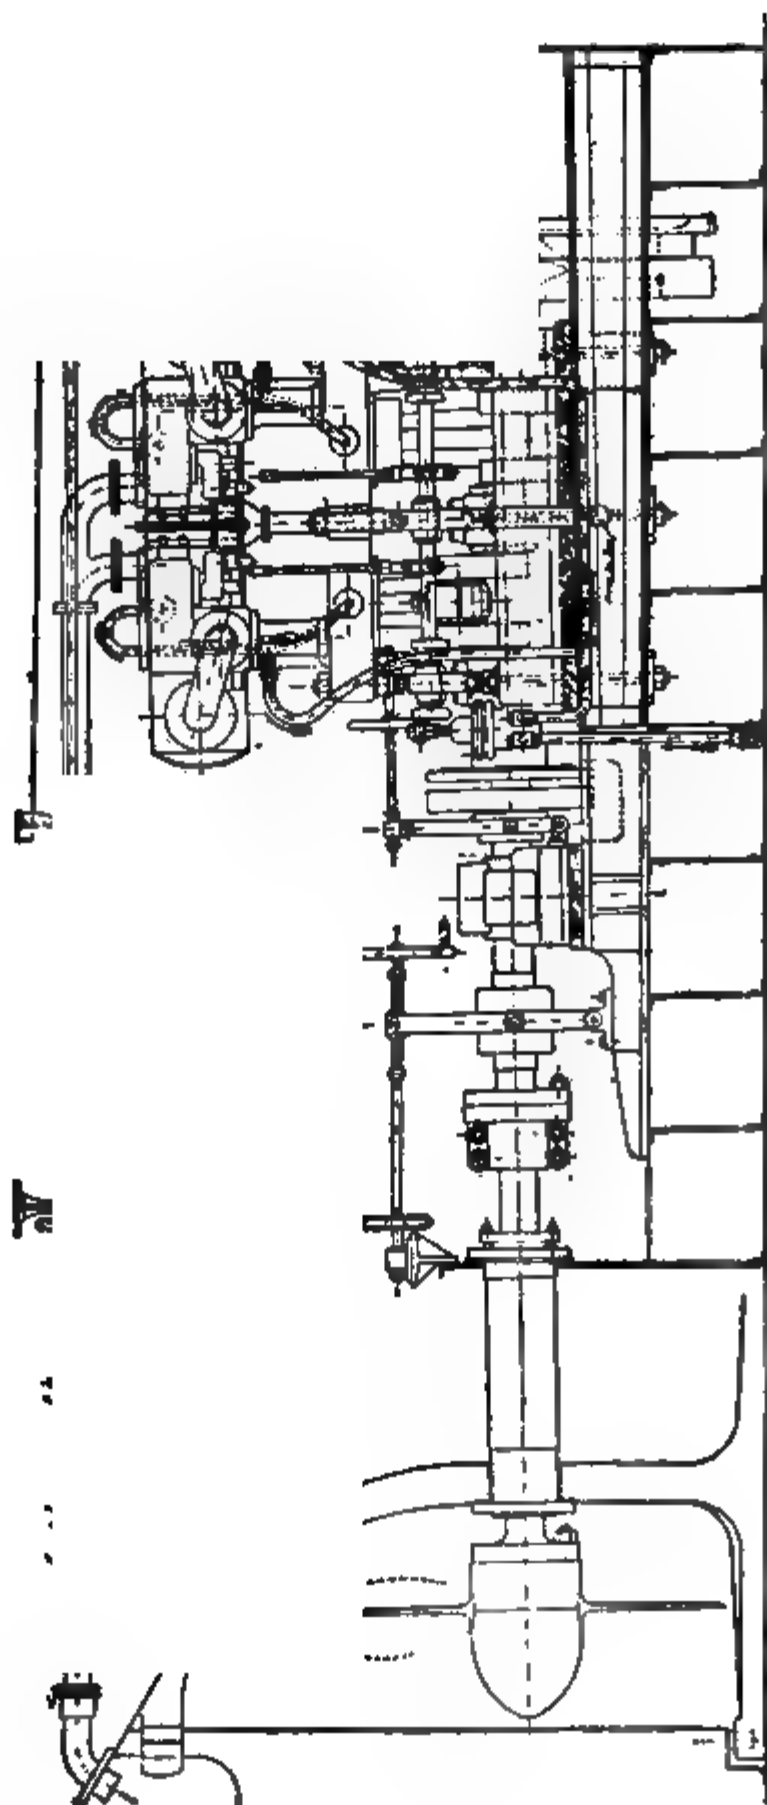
Sectional View of Simpler Boat Engine. About 1895.
